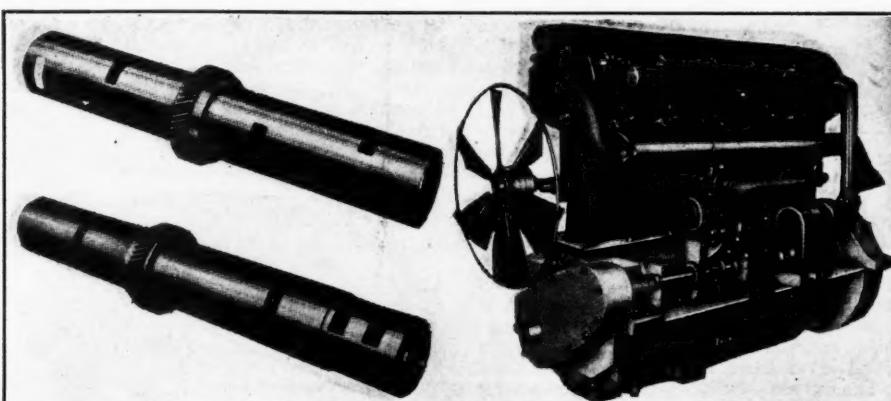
Left—Jaeger motor. Note manifolds attached to the ends of the cylinder casting.
